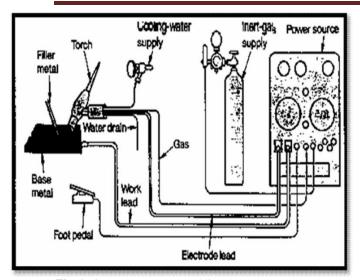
Gas Tungsten Arc Welding Apparatus
